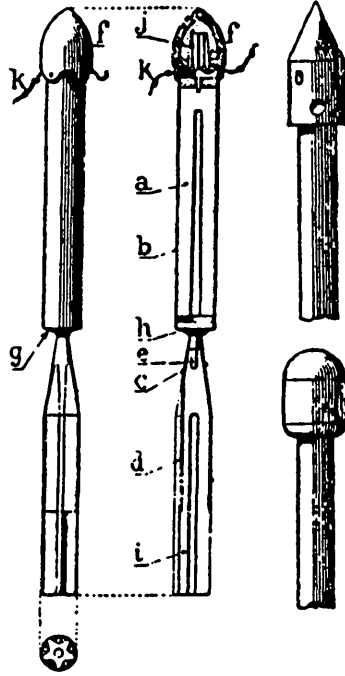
6 cm rocket with shell, Right: incendiary head (top), balls head (bottom).
